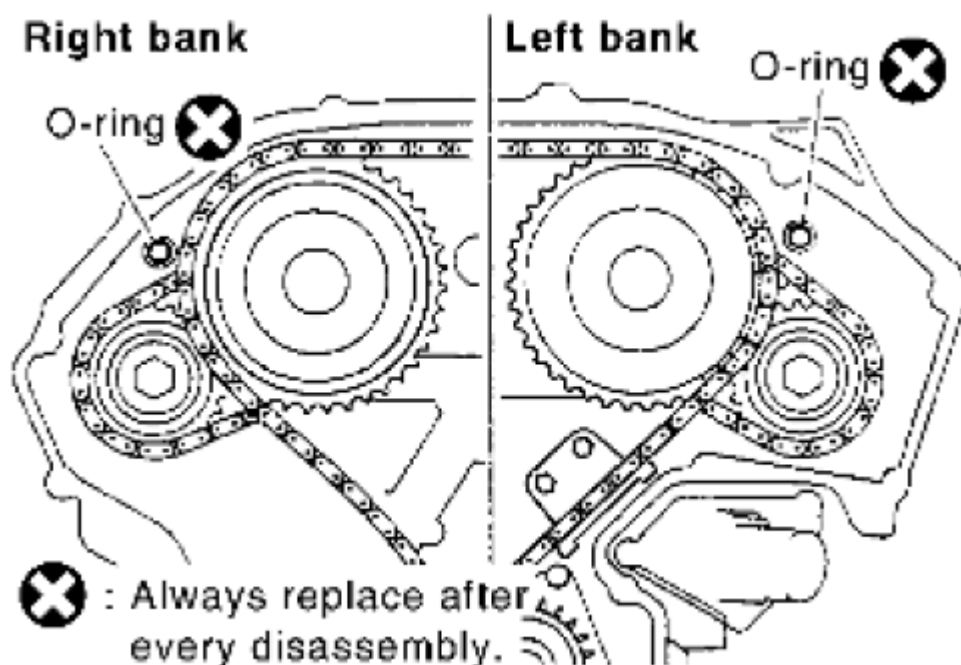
Identifying O-Rings On Rear Timing Chain Case
